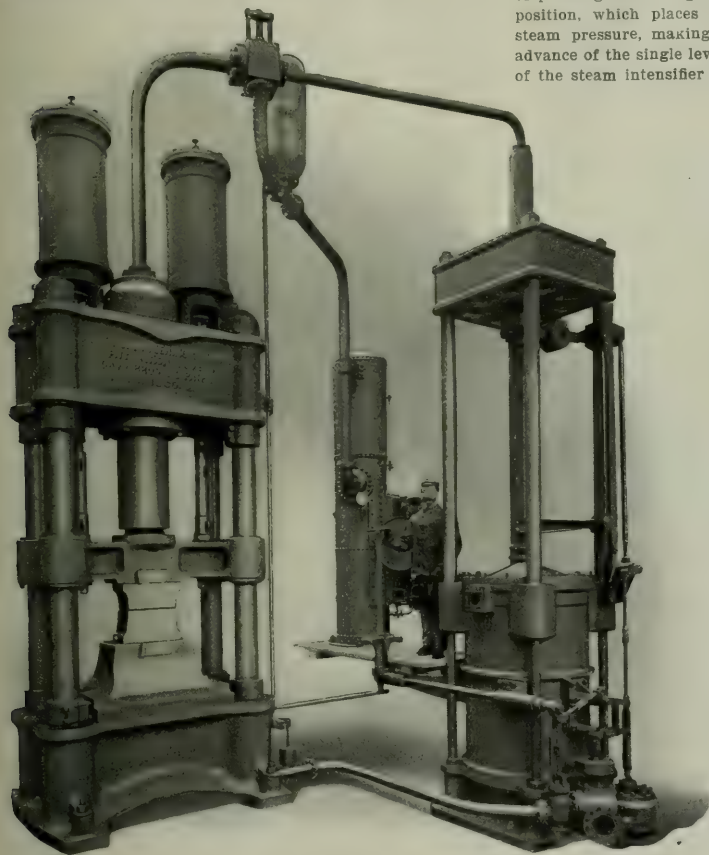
Rapid Action Steam-Hydraulic Forging Press; Four Column Type, Single Cylinder.
